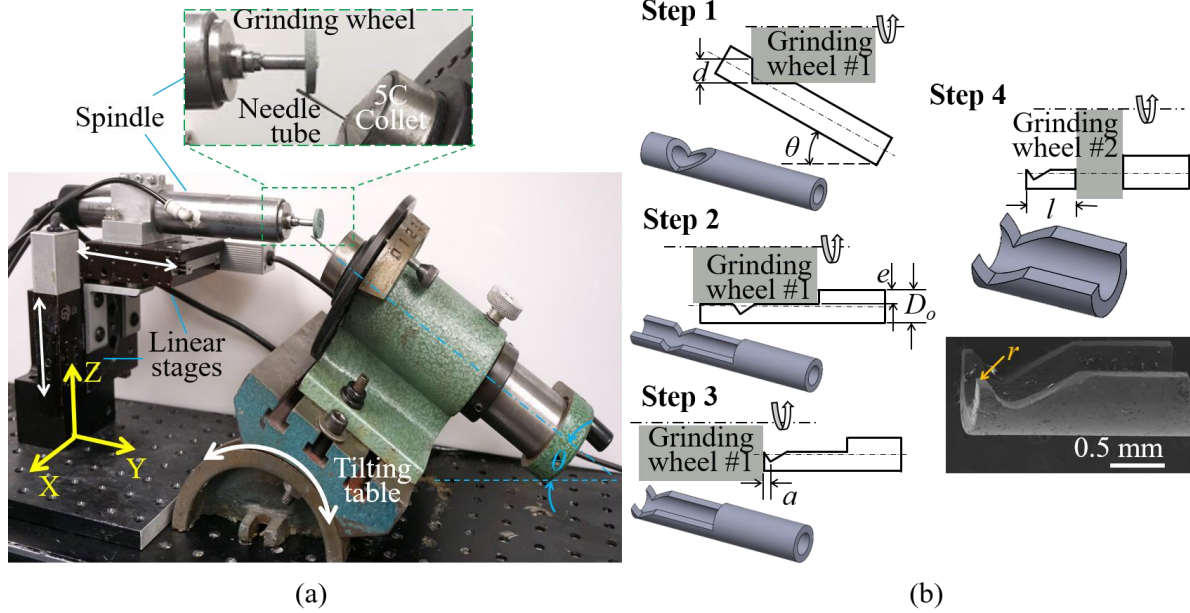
Clot cutting tool grinding: (a) grinding machine setup and (b) four steps to grind the clot cutting tool.
